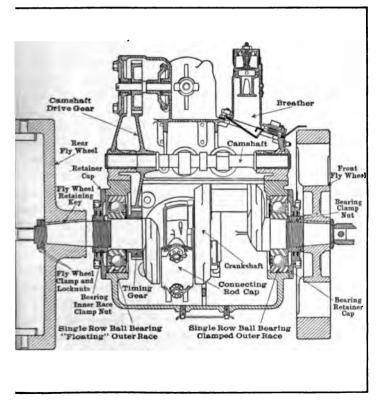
Showing Practical Application of Ball Bearings for Crankshai and Camshaft Support.
